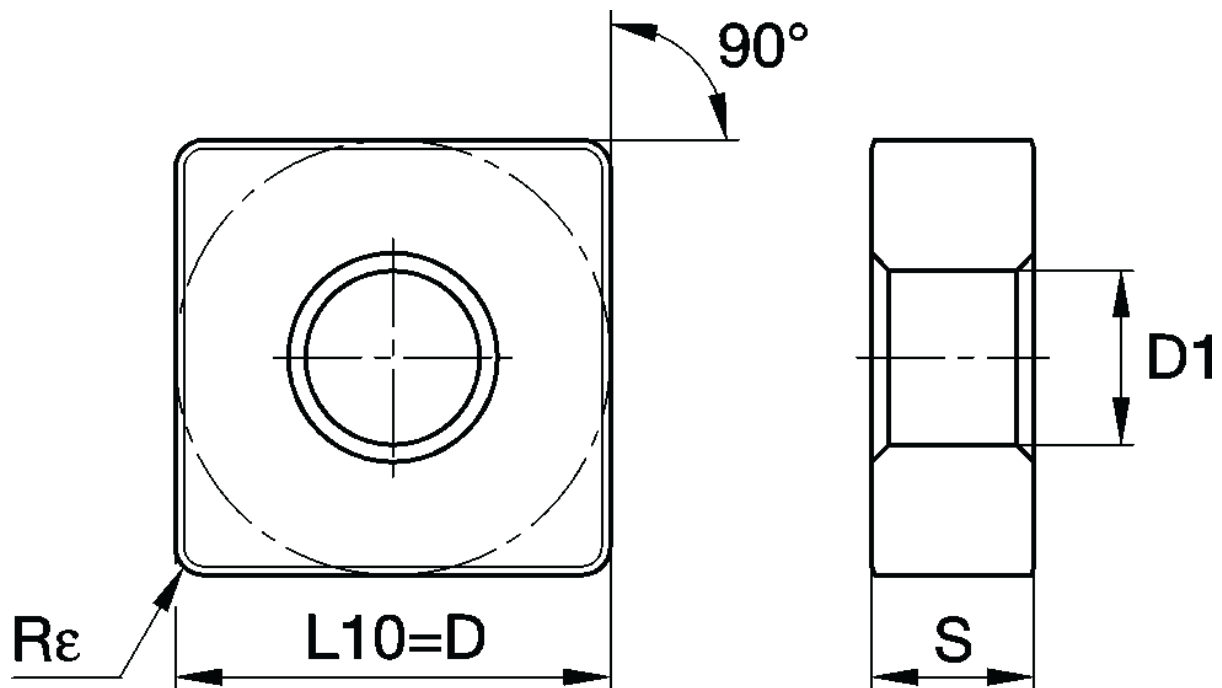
Cutting tool insert geometry (SNMG120408 RP KCP10)
